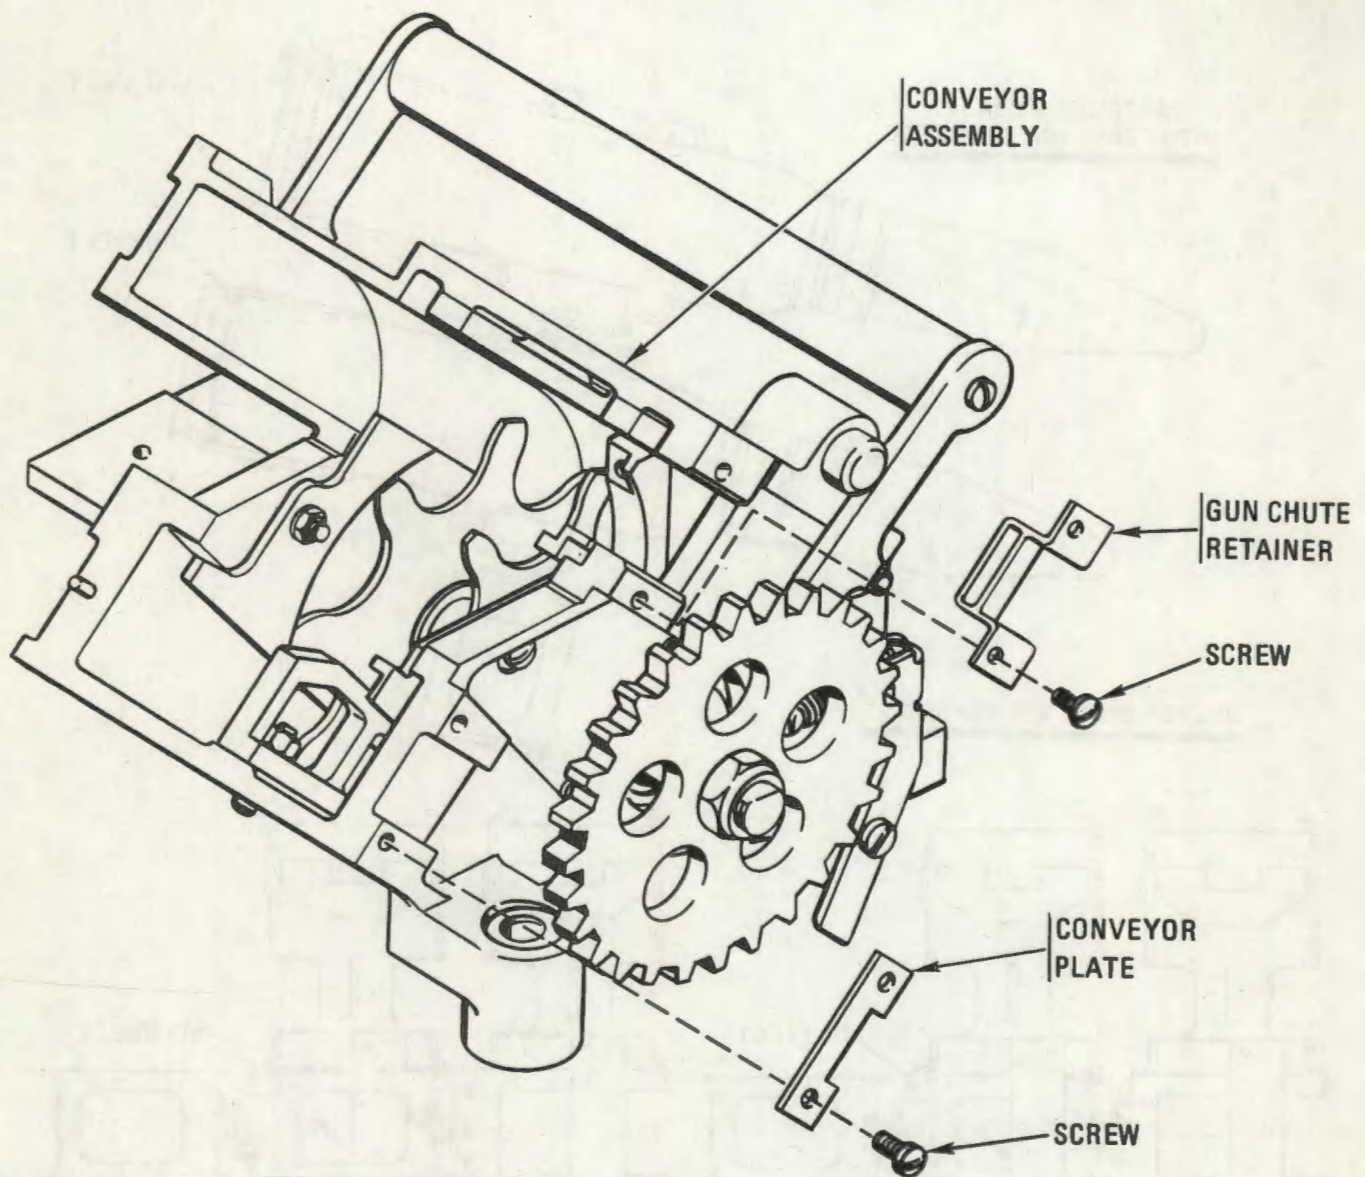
Drum assembly, end view showing conveyor assembly controls.
